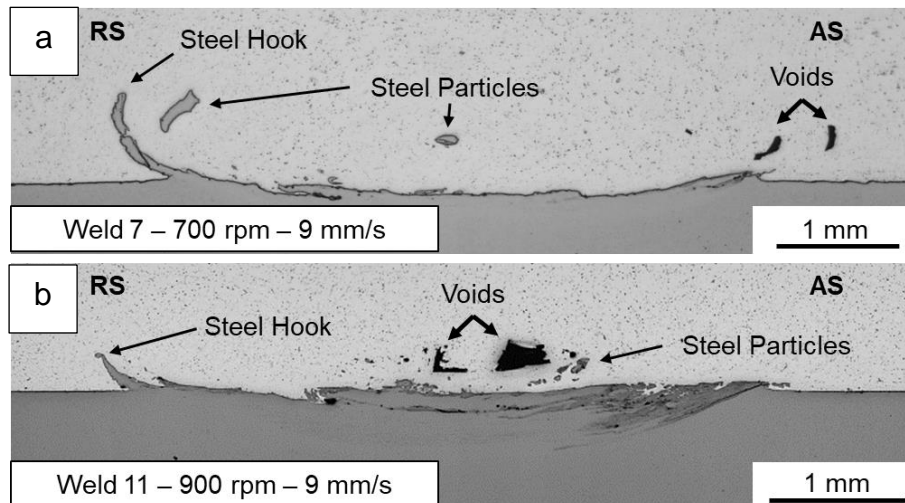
Macrostructure of the welds produced by FSW using a welding speed of 9 mm/s and rotational speed of (a) 700 rpm, and (b) 900 rpm.
